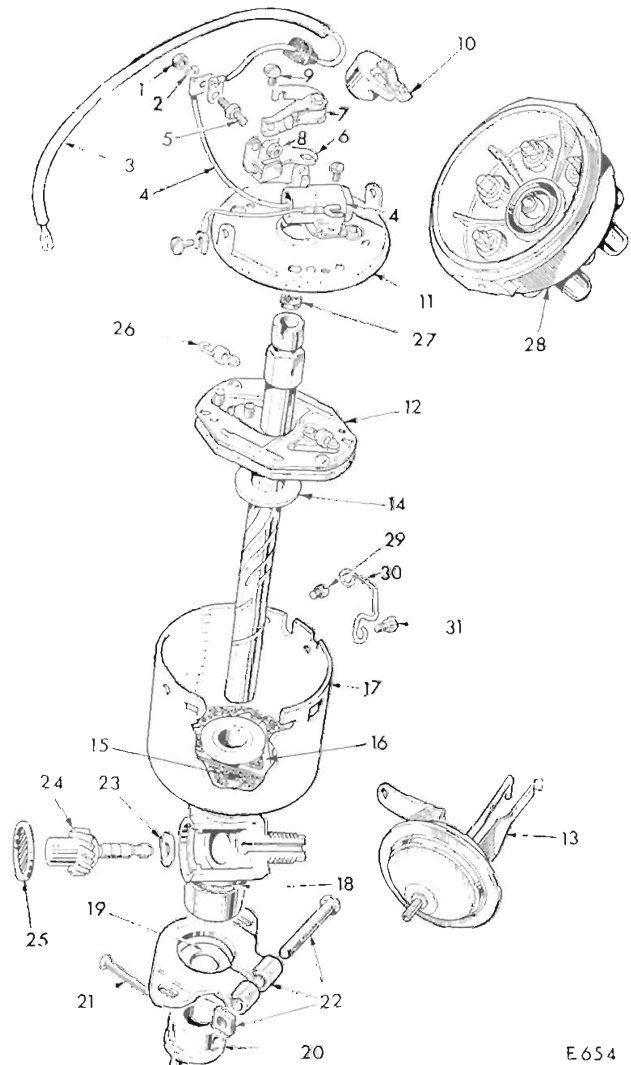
Exploded arrangement of Vitesse distributor (A.C. Delco Type D202)
